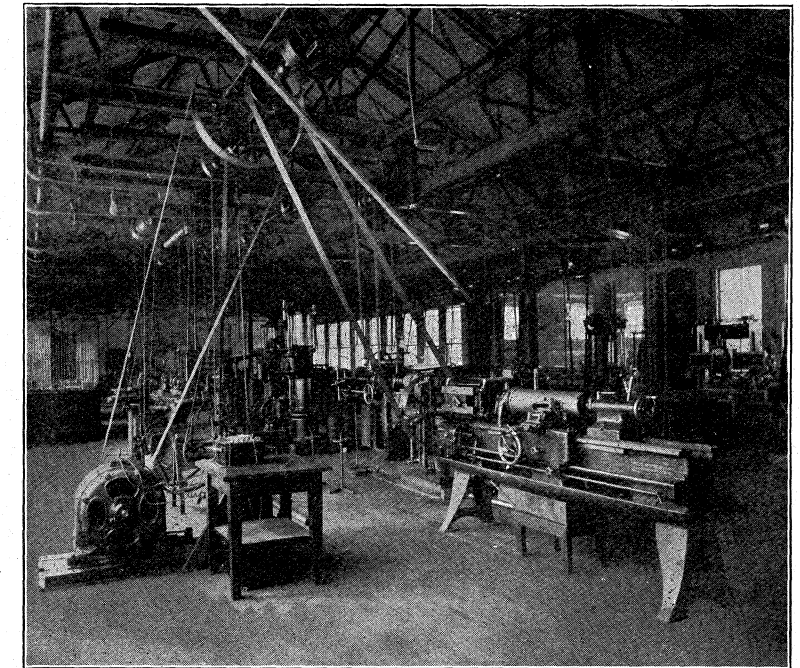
U. OF I. MACHINE SHOP, LATHE AND MOTOR DRIVE FOR TESTS OF HIGH SPEED TOOL STEELS
